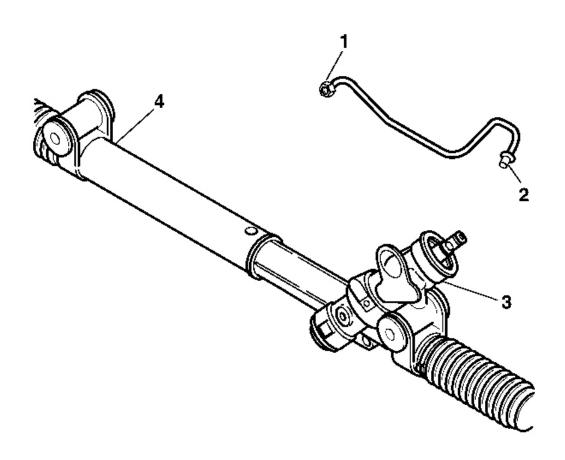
Installing Smaller Cylinder Line Into Valve Housing Courtesy of GENERAL MOTORS CORP.
